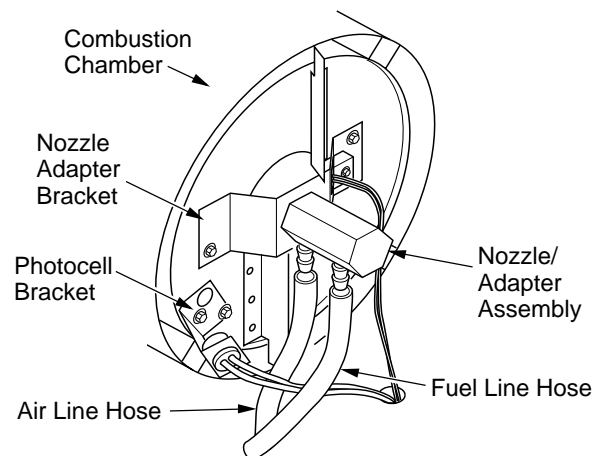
Removing Air and Fuel Line Hoses (200T Model Only)
